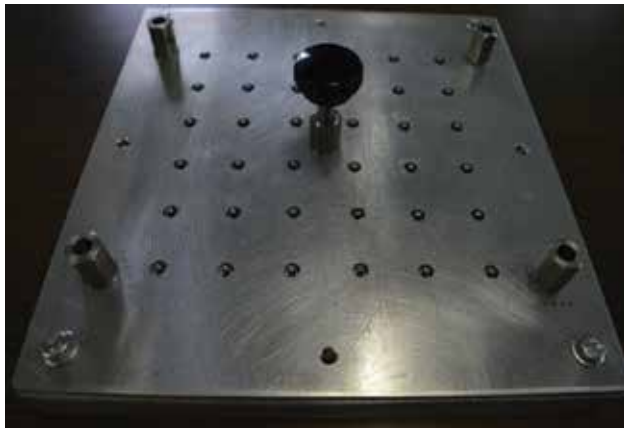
Sample holder used to build ring-shaped samples of nanocomposite having dimensions of 3 mm and 7 mm for inner and outer diameter respectively.
